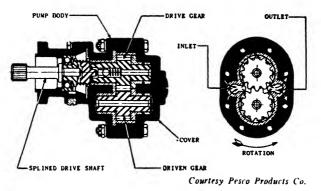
GEAR-TYPE POWER PUMP-CUTAWAY VIEW.
